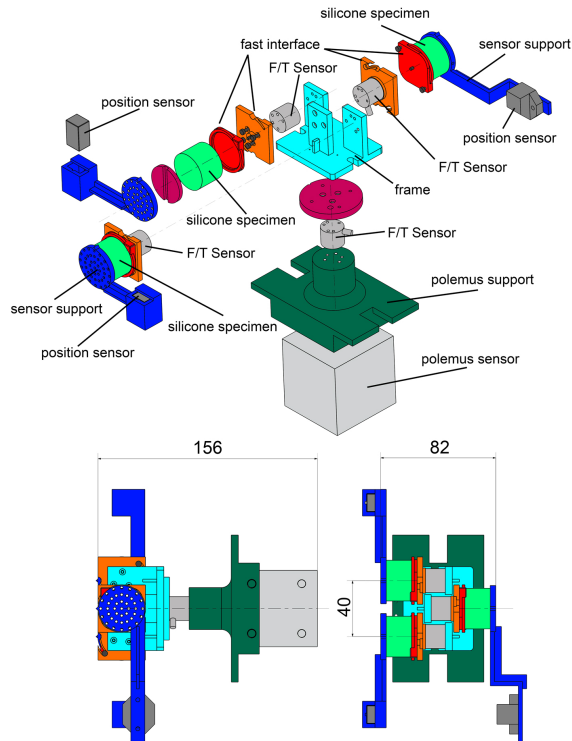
Exploded drawing view of the manipulandum and its main features with dimensions in [mm].
